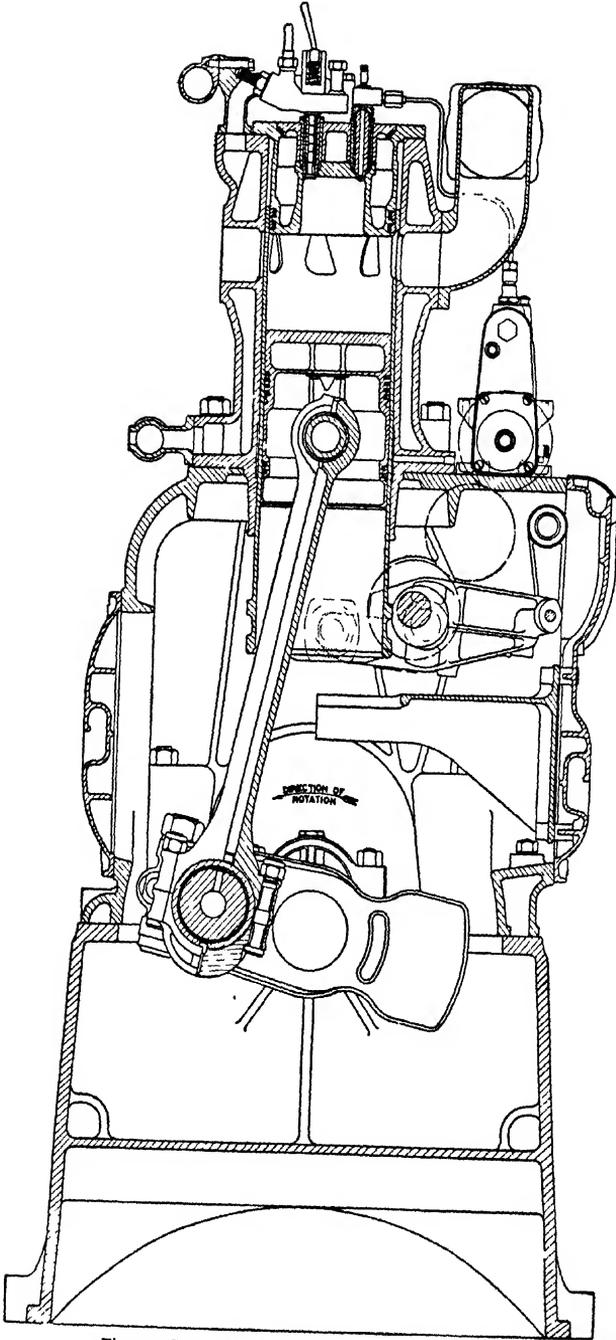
Section, Vickers-Ricardo Eight-cylinder Engine
